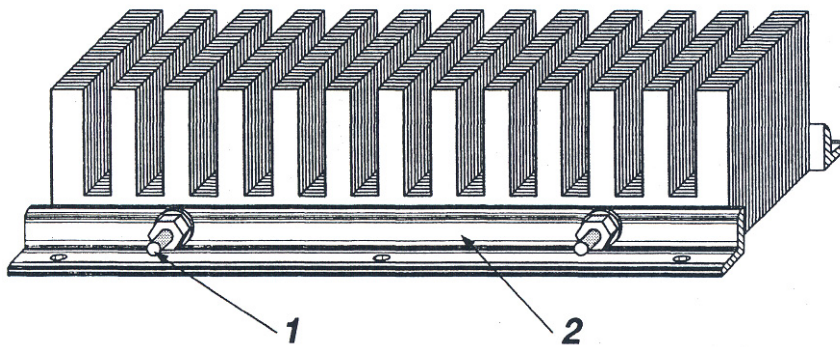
Laminated stack assembled by using: 1 - bolts, and 2 - pressing angle bars.
